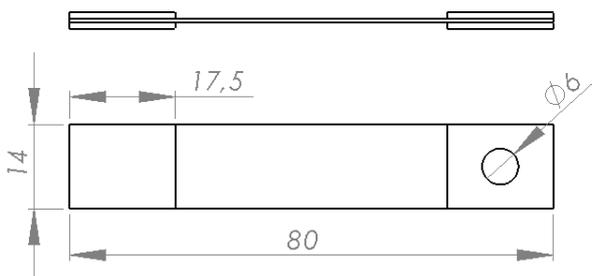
Geometry and dimensions for the carbon/epoxy tensile impact samples.
